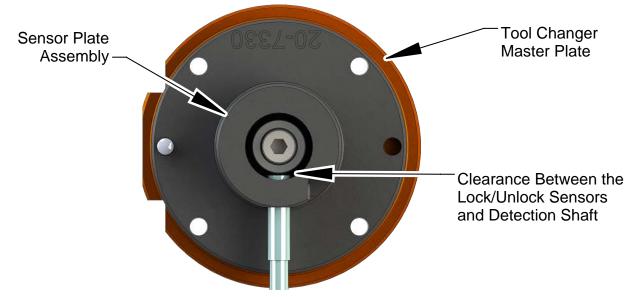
QC-11 Sensor Plate Assembly Installation
